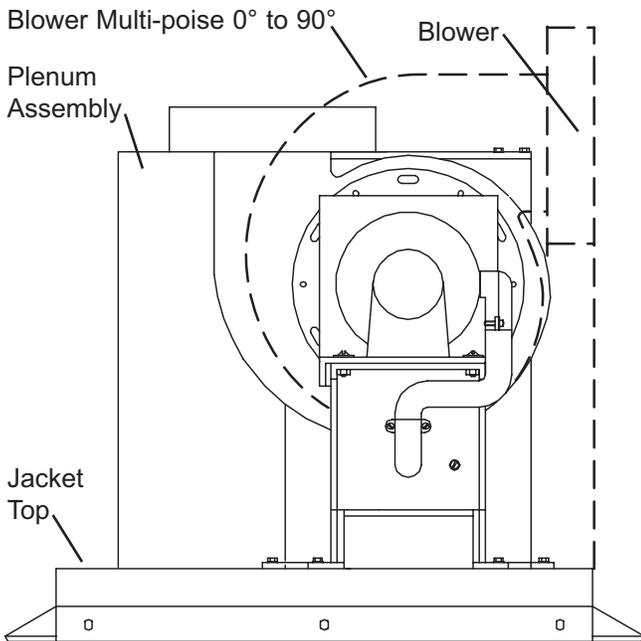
Draft Assembly Mounting, Models 0514-1826
